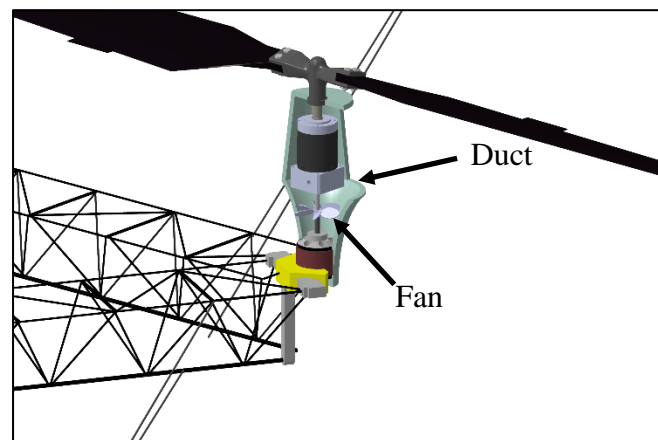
Cutaway view of the rotor hub assembly showing the innovative cooling fan.
